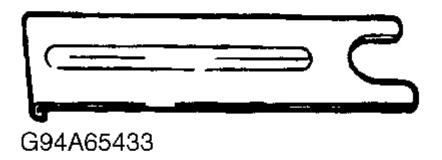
Hydraulic Clutch Line Separator (Quick Connect Disconnect Tool) Courtesy of GENERAL MOTORS CORP.
